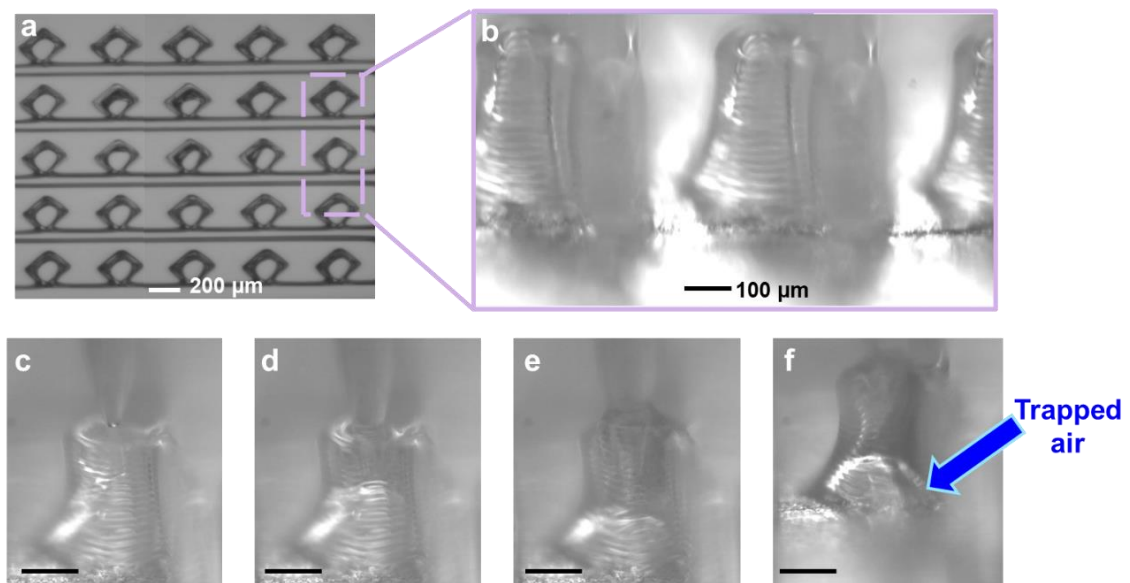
a.) Successfully printed square based pyramid micro mould array of 25 b.) Side view of the printed micro mould array c.) Pyramid filling attempt, with tip being centred above each mould and then lowered into the mould. d-f.) This is followed by applying a back pressure of 0.3 bar into the nozzle. The overhanging droplet of the tip makes contact with the interior walls of the pyramid and thus helps to start filling the pyramid. However, as the ink fills up the upper part of the pyramid along the interior side walls, the bottom part of the pyramid has air bubbles trapped inside it, preventing the ink from reaching the bottom of the pyramid. (Scale bar: 100 µm)
